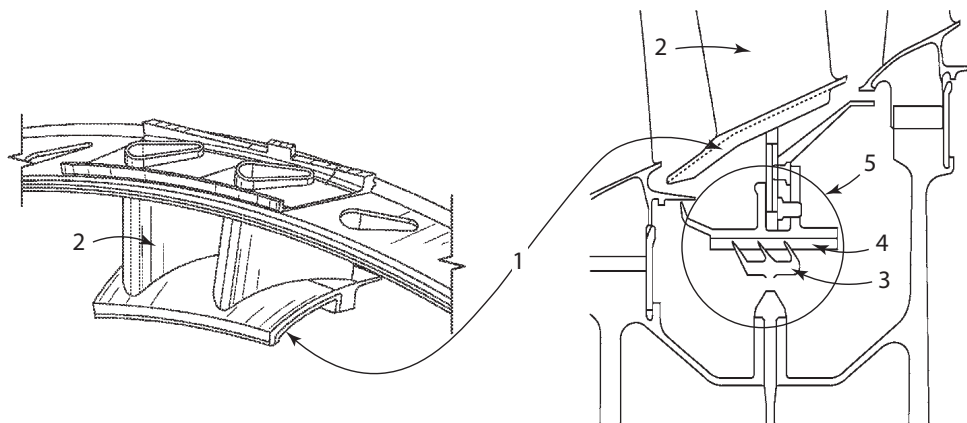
Schematic diagram of the vane assembly and a side view of an interstage seal. The figure identifies with labels: (1) Inner ring; (2) Stator vane; (3) Labyrinth seal member, sometimes referred as fin; (4) Abradable lining; (5) Interstage seal assembly. Extracted and adapted from Freeman *et al.* [18] (left) and Piggott *et al.* [15](right)
